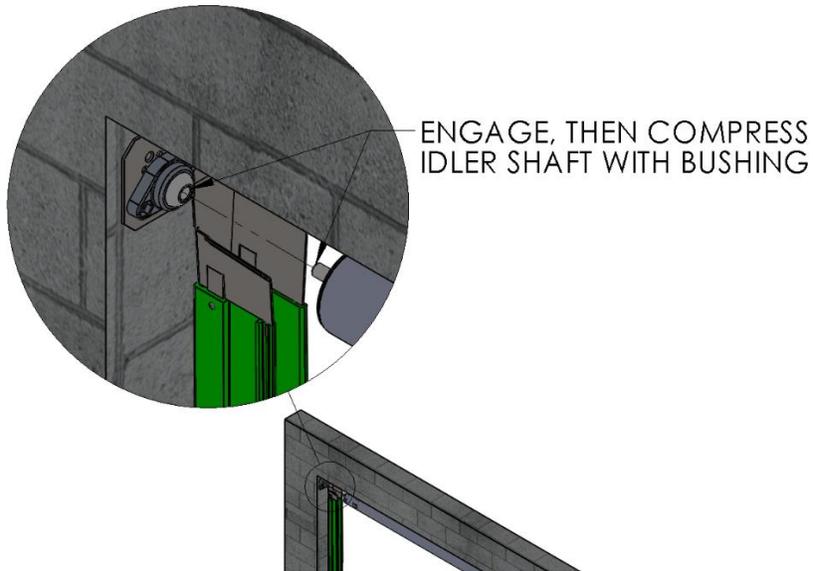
Re-Install Idler Shaft into Nylon Bushing
